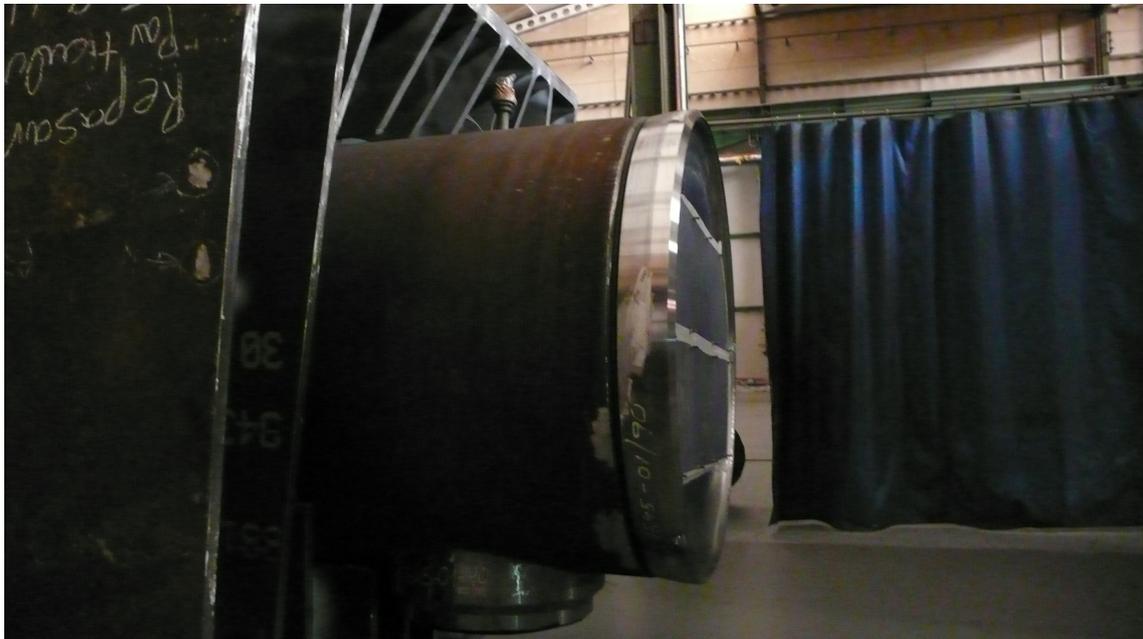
heat exchanger flange to vessel weld setup, nuclear job
